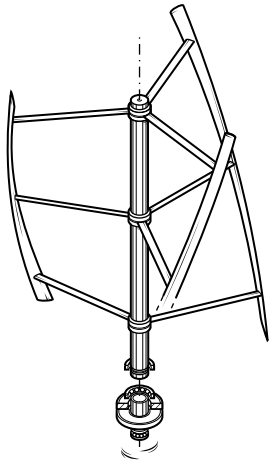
Sketch of a rotor with a magnetic thrust bearing.
